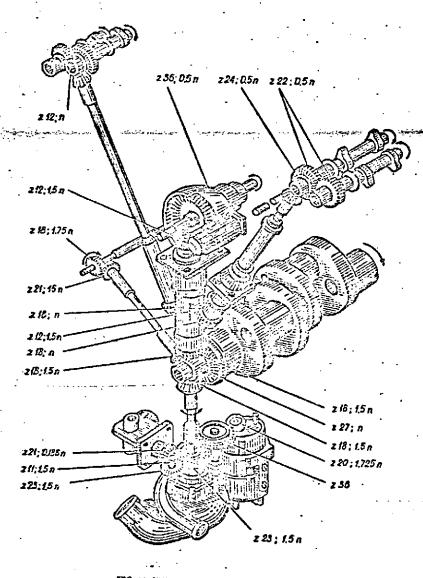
, SNEEN ACCESSORY DRIVE DIAGRAM
